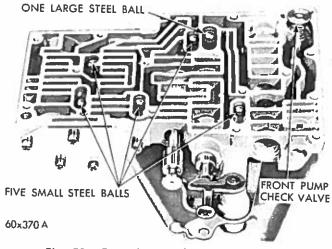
Front Pump Check Valve and Steel Ball Locations
